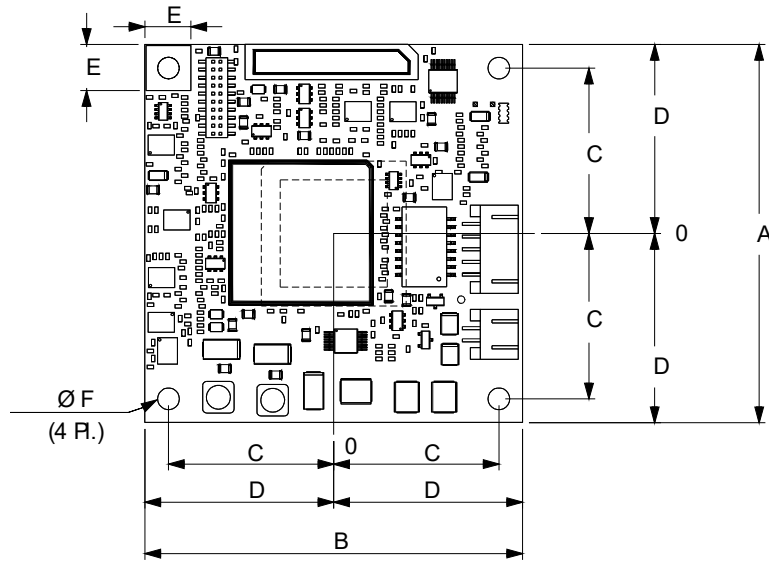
XETK-V2.0A/C Dimensions - Top View
